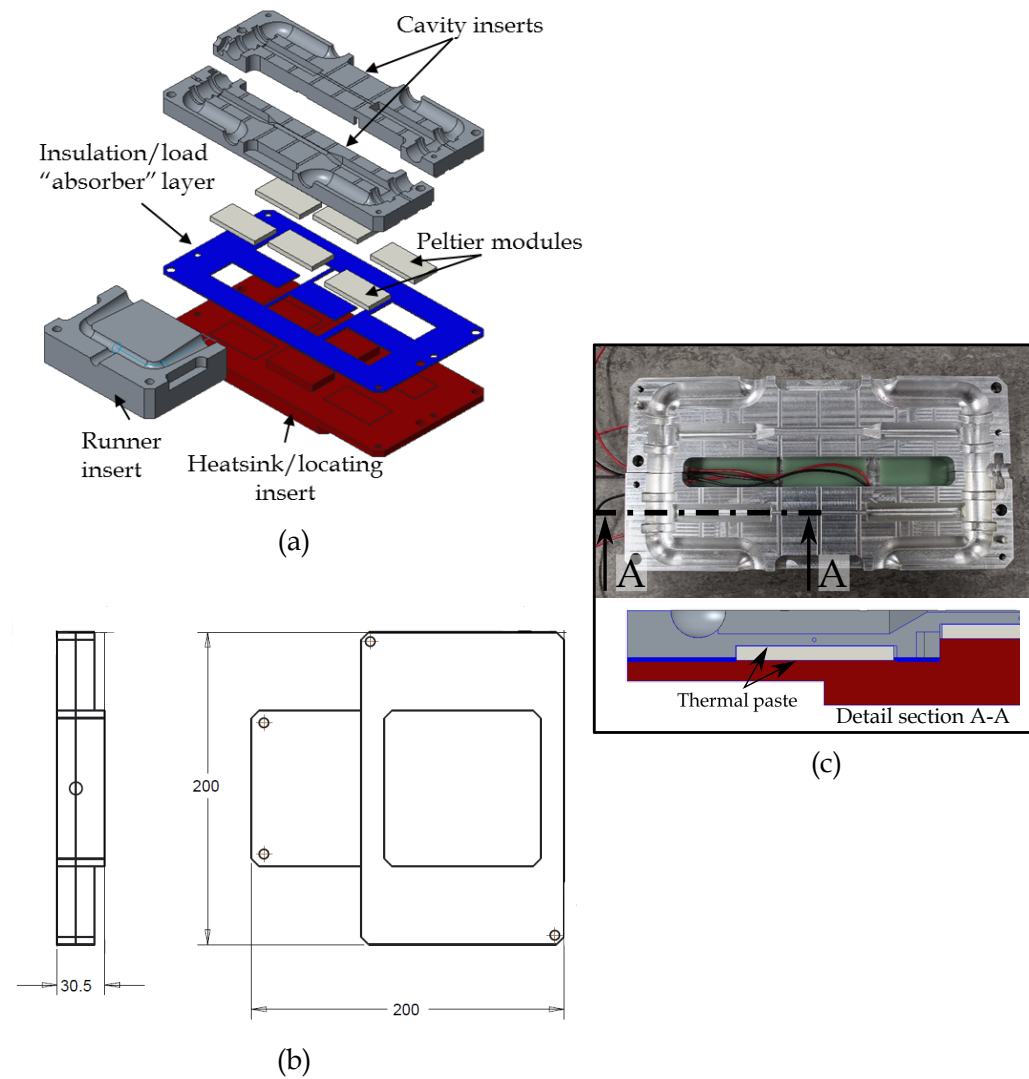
Prototype mould for production IM machine with regionally controlled temperature. (a) Exploded assembly for the bottom half of the mould. (b) Main dimensions of the whole assembly. (c) Cross section of the bottom cavity showing Peltier module location.
